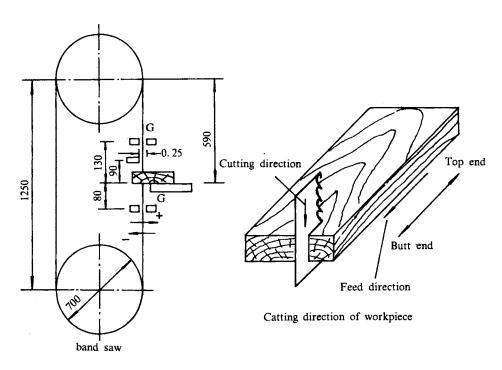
Experimental apparatus and cutting direction of workpiece.
